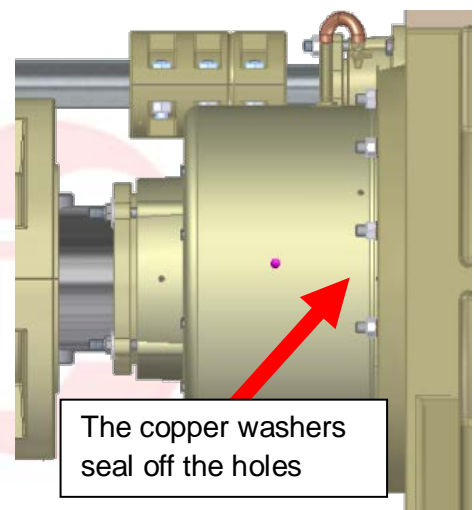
Side view of the thrust pot attached to the lower vacuum chamber
